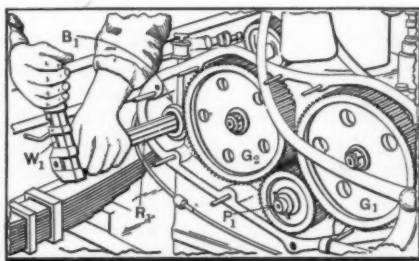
Method of reaming a tight bushing without otherwise disturbing the motor
